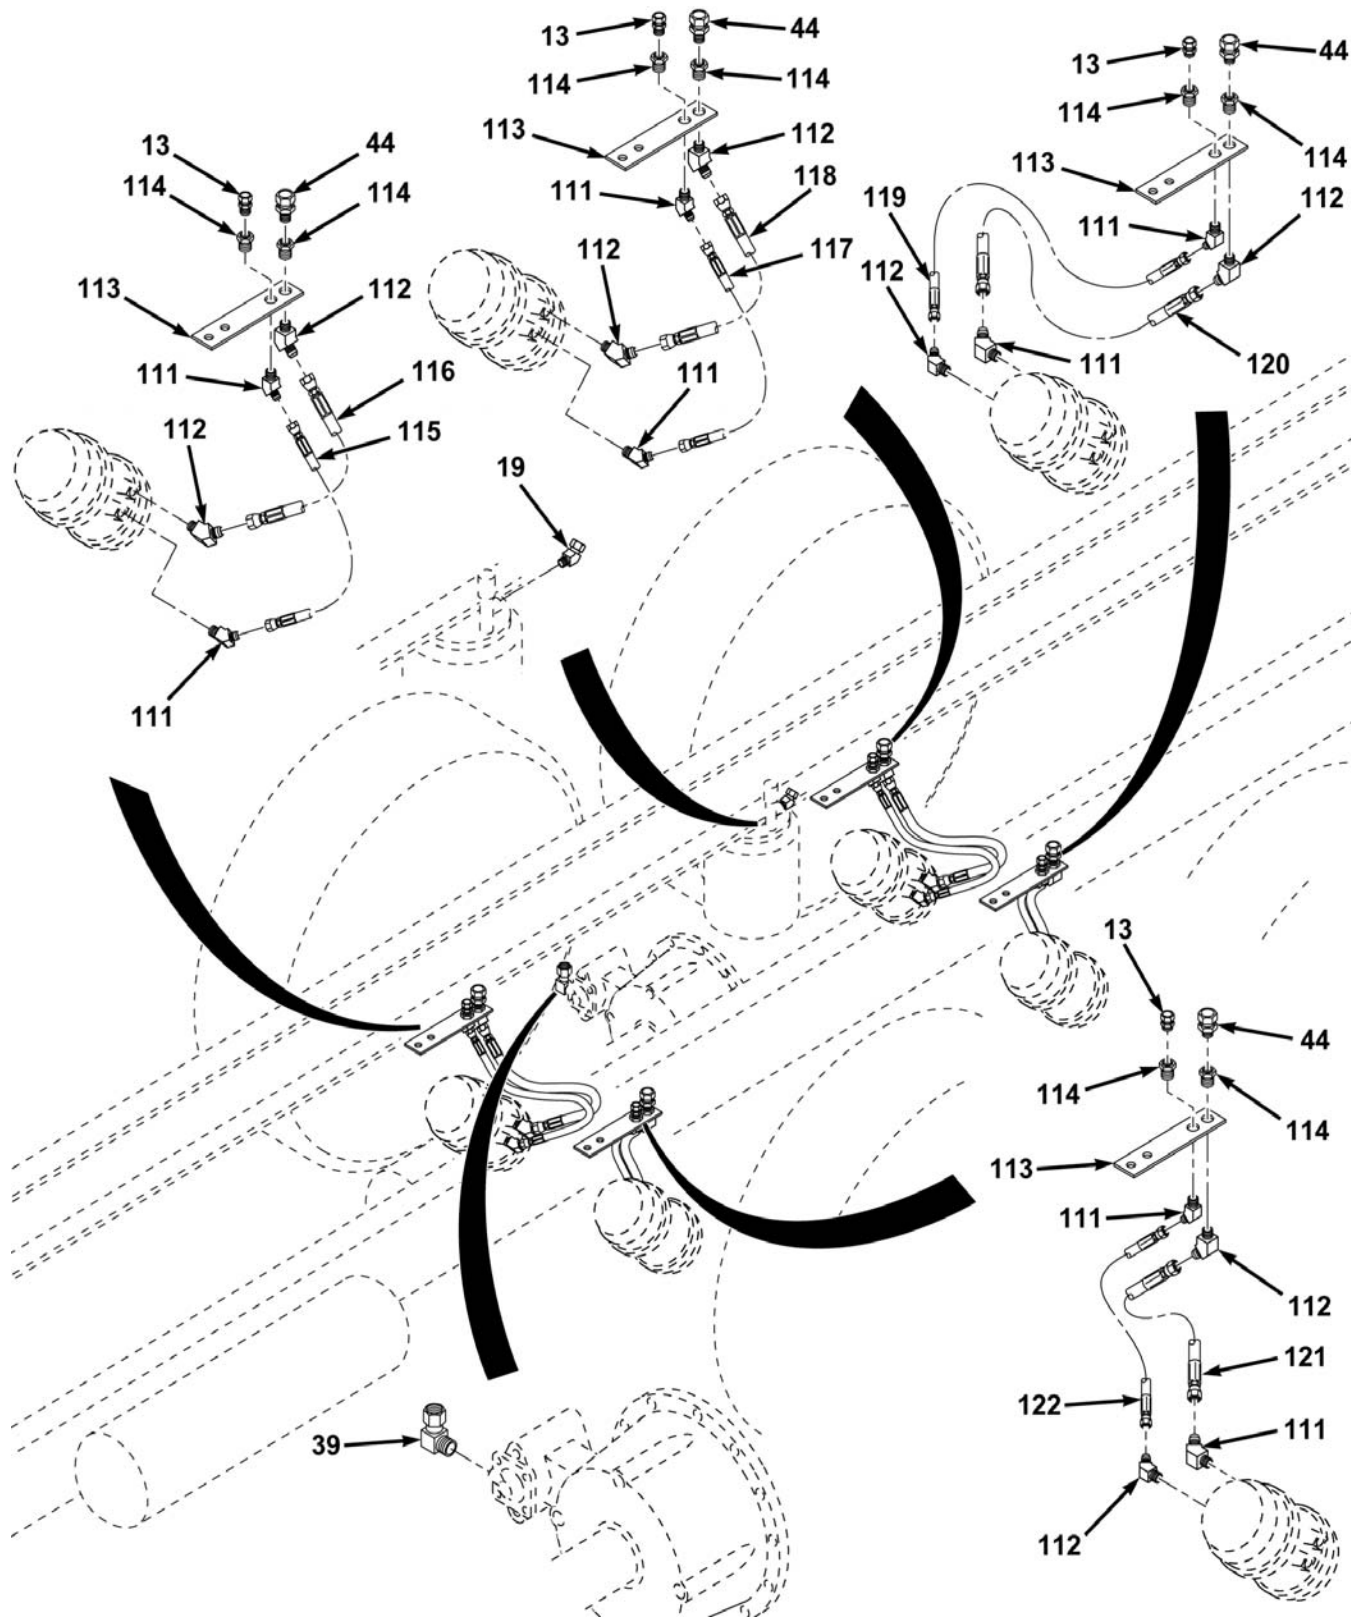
CHASSIS AIR (SHEET 6 OF 15)
